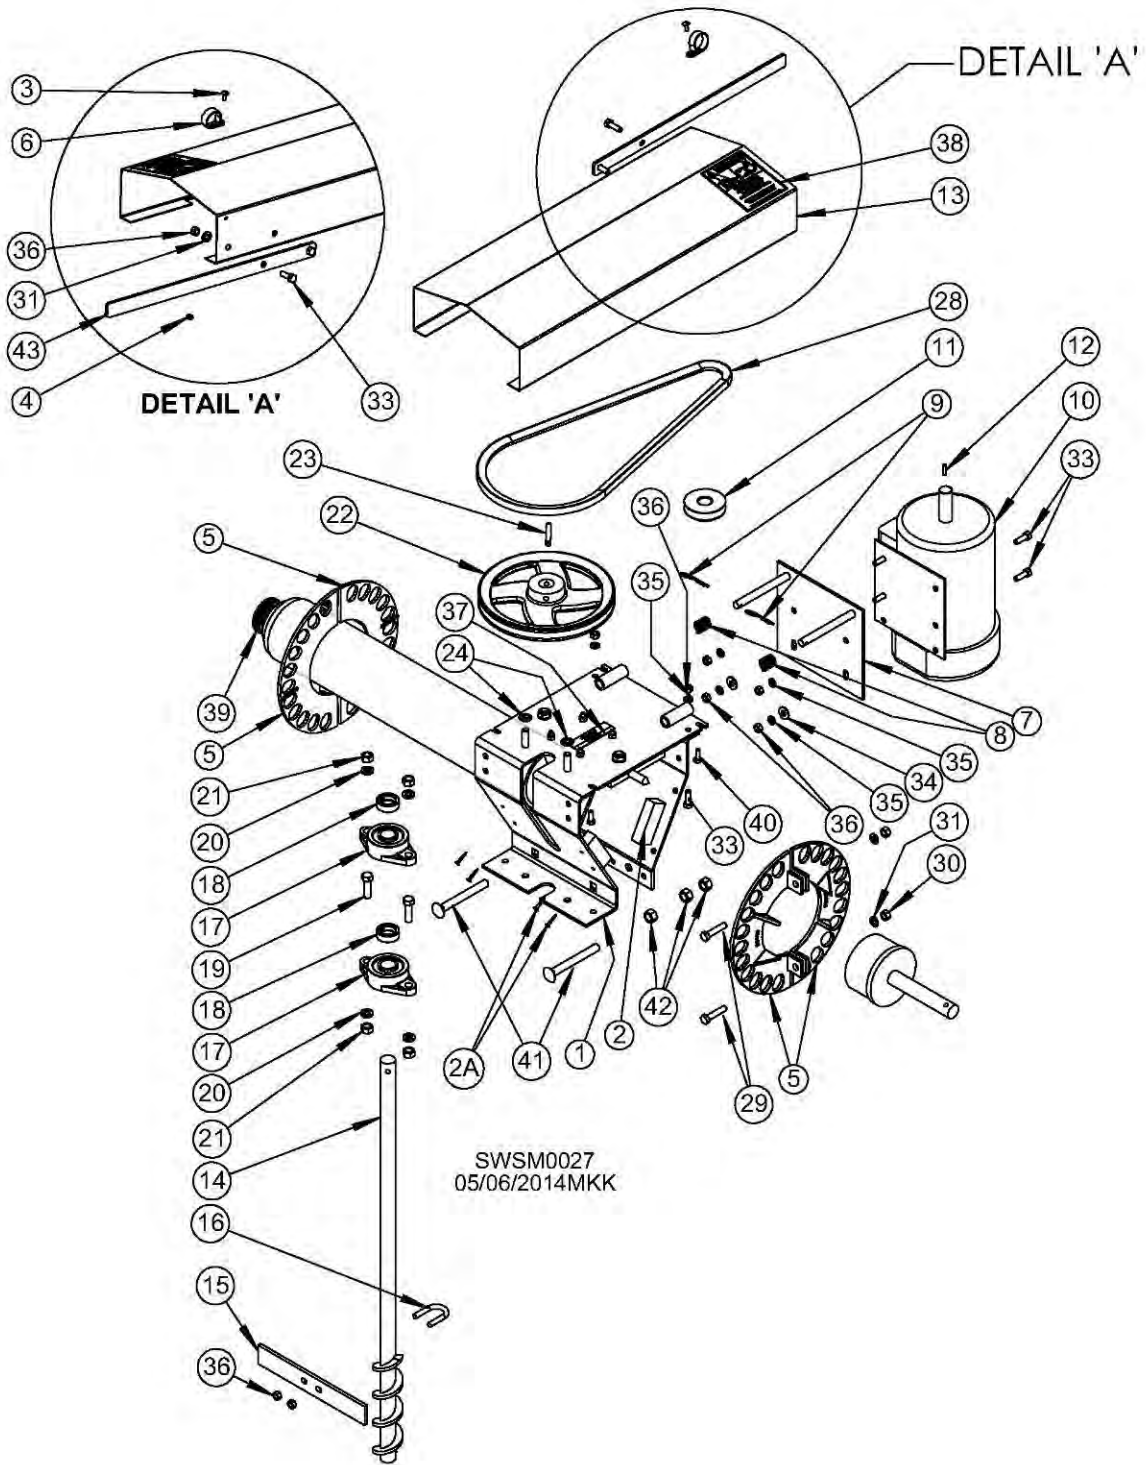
Primary Wrap-Around Carriage, Exploded View
